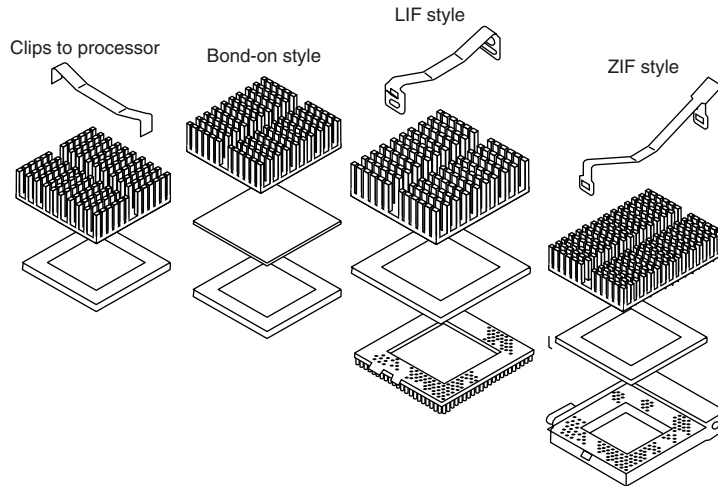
Passive heatsinks for socketed processors showing various attachment methods.
